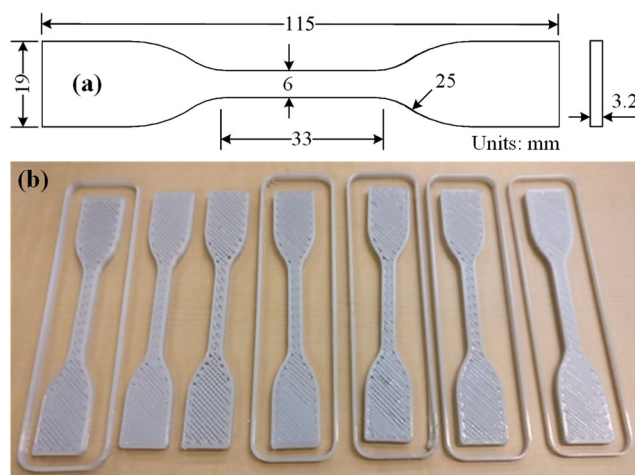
a ASTM D638 Type IV specimen dimensions. b Specimens printed using different printer settings. The outer shell is added to give extra time for layer cooling experiments
